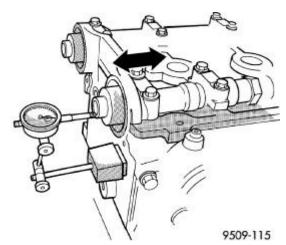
Measuring Camshaft End Play Courtesy of CHRYSLER GROUP, LLC
